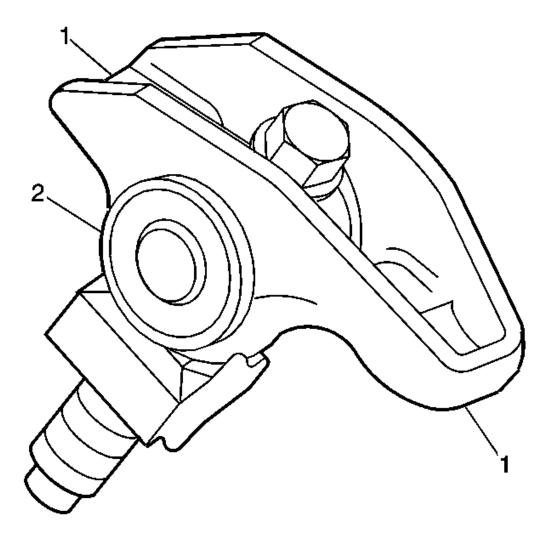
Inspecting Valve Rocker Arms For Damage Courtesy of GENERAL MOTORS CORP.
